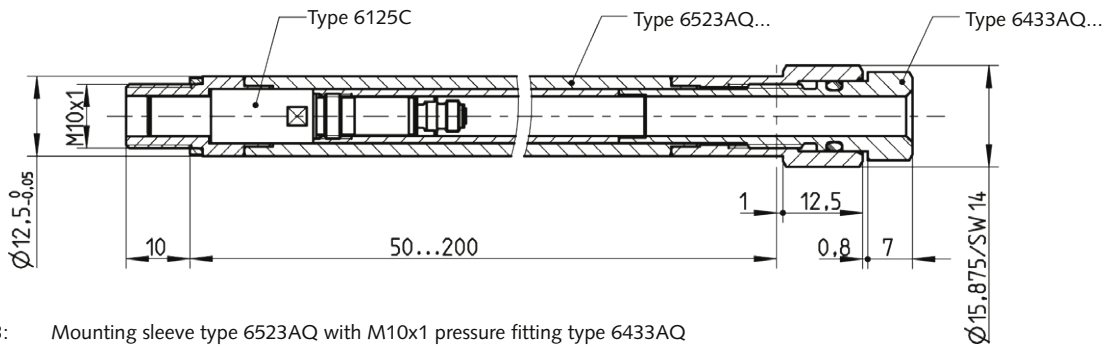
Mounting sleeve type 6523AQ with M10x1 pressure fitting type 6433AQ
